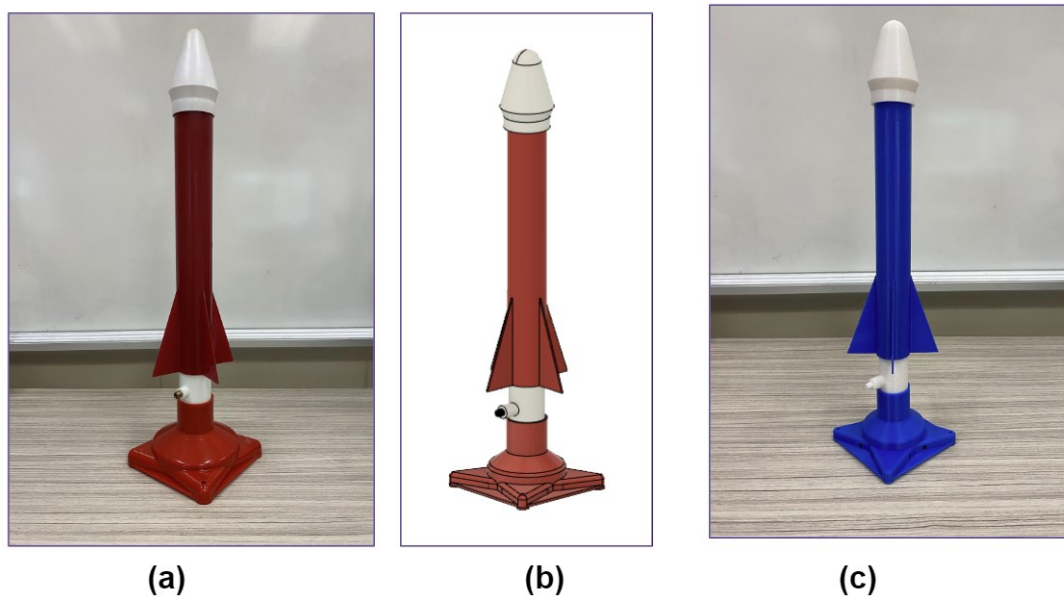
Reverse-engineering example, (a) actual model, (b) CAD model, (c) 3D printed model
